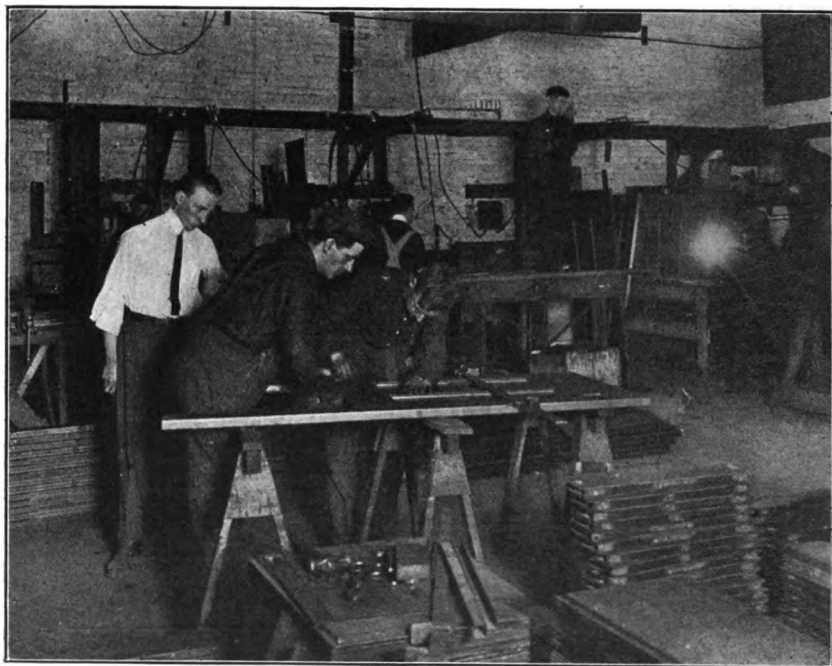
VIEW OF CORNER OF WELDING SHOP.
